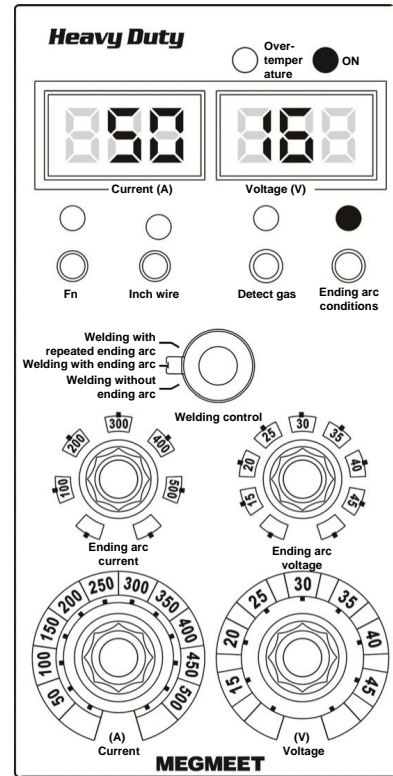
Selecting the mode of welding with ending arc
